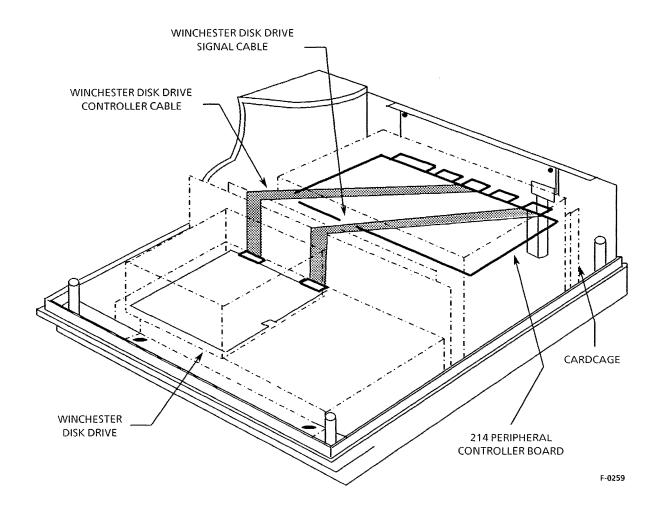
Winchester Disk Drive Subsystem Component Locations
